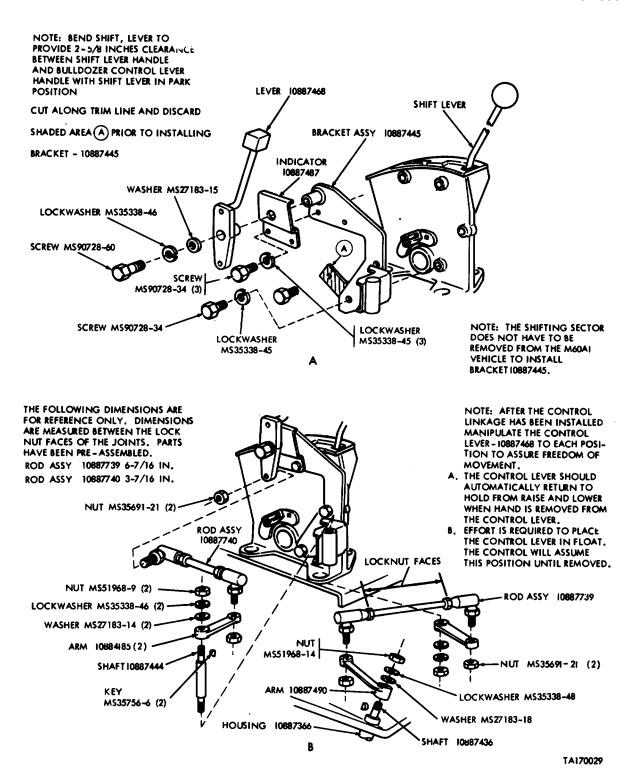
Installation of blade assembly manual control lever and linkage (M60A1, M60A1 RISE, or M60A3).
